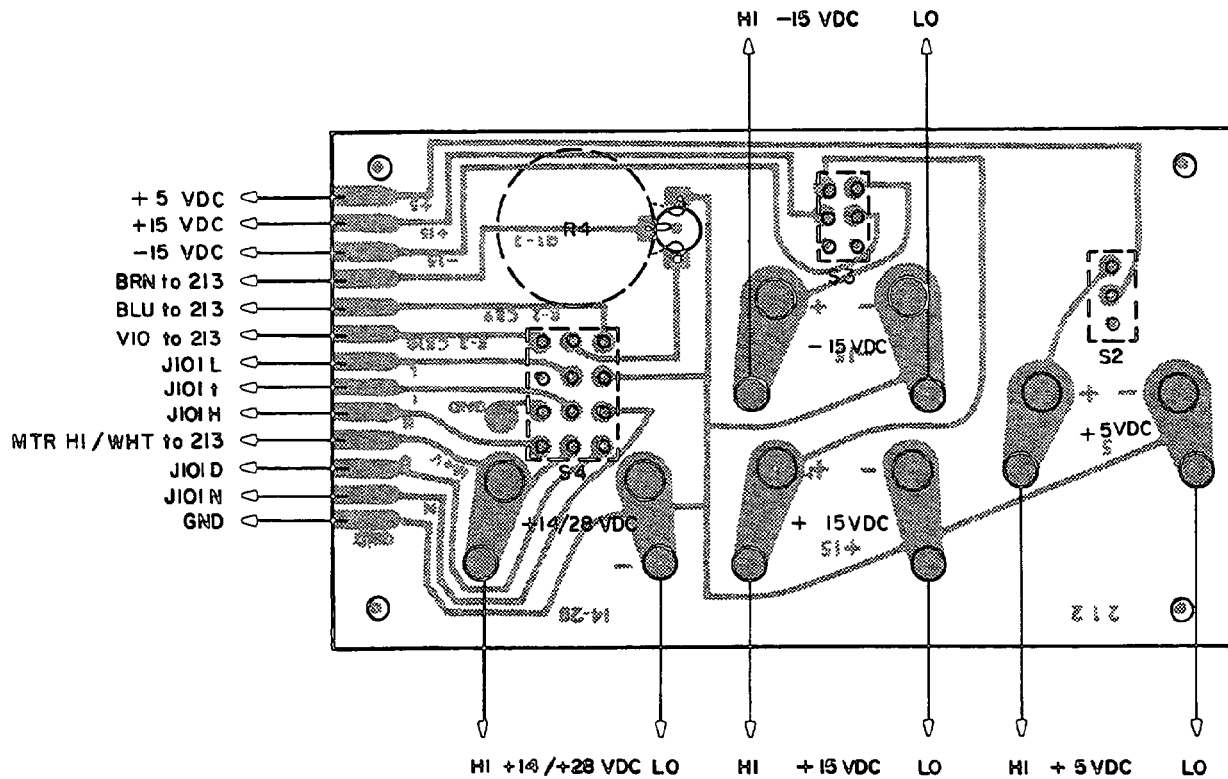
P.C. BOARD ASSEMBLY, BOARD 212, DRAWING
